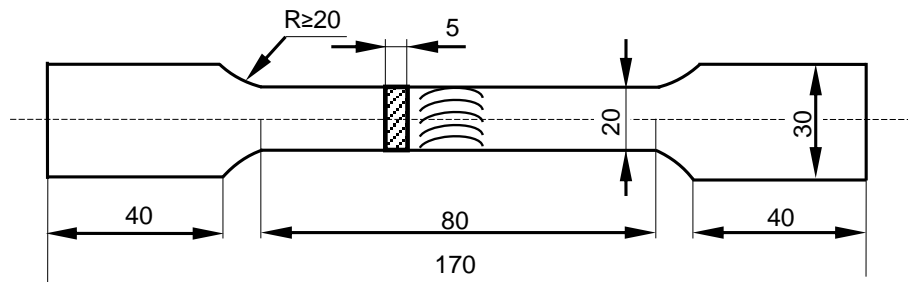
Dimensions of 1.4539 austenitic steel sample with a weld for mechanical properties research
